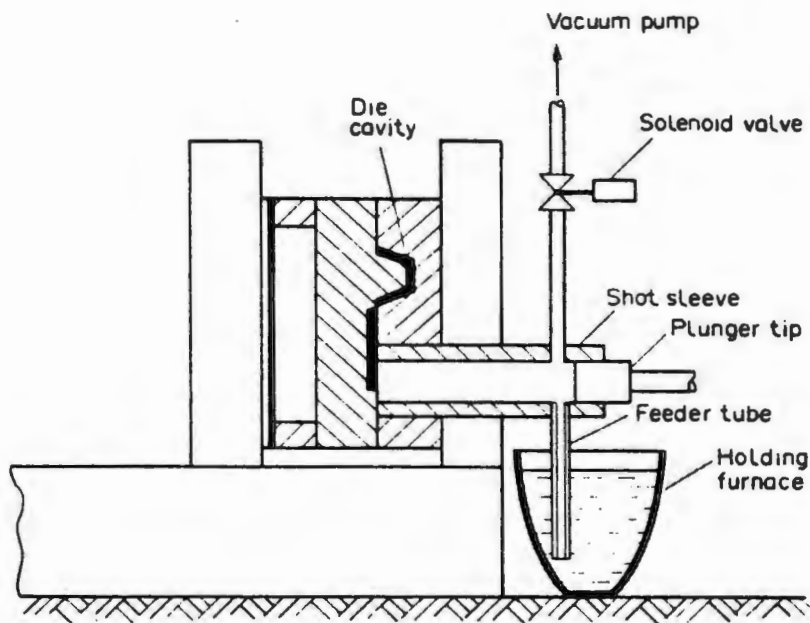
Vacuum-Type Transfer System with the Vacuum Cut-Off in the Shot Sleeve (Reprinted from [7])
